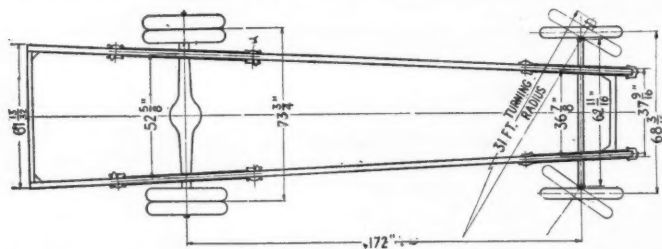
Diagrammatic plan view of the type J chassis, showing major dimensions, relative position of frame, springs, wheels and axles
